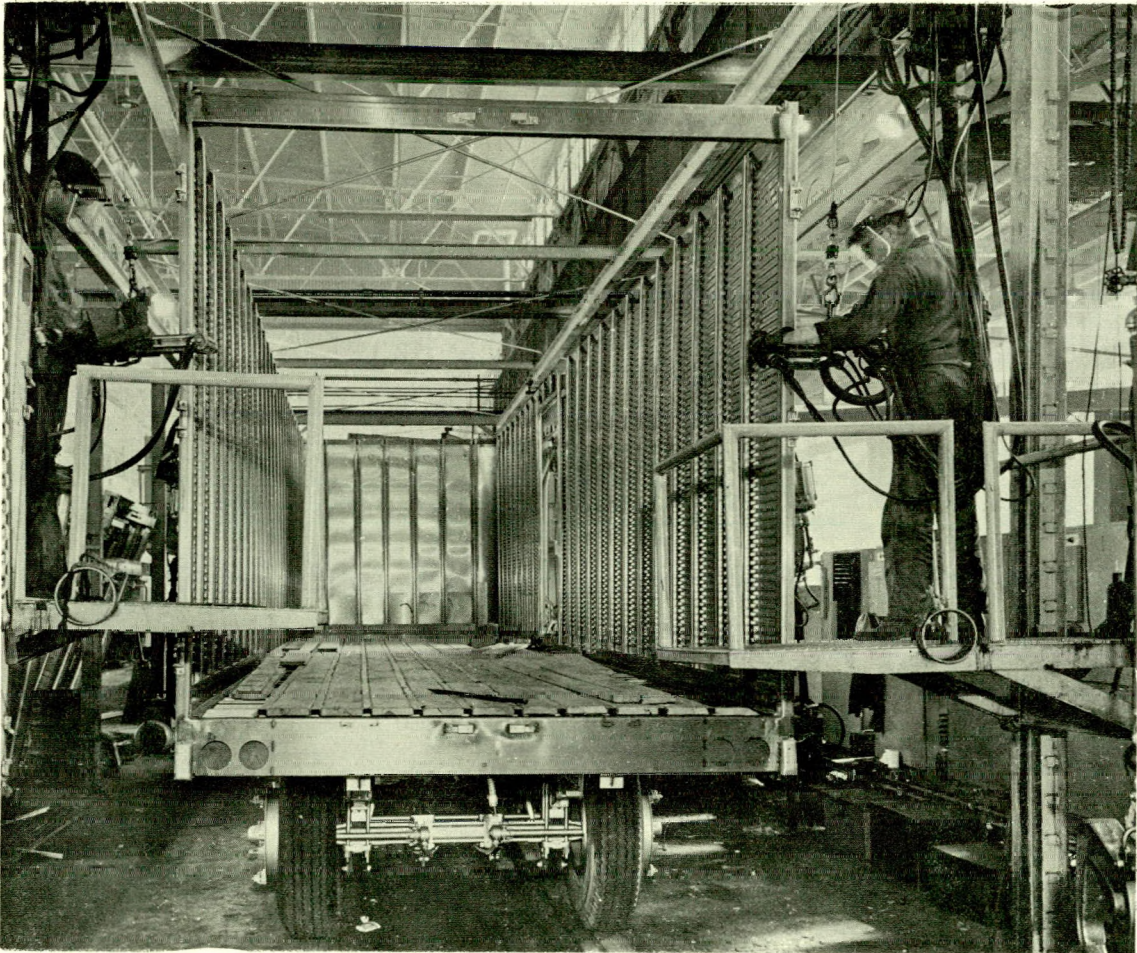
ALMAR 363 STRUCTURAL MEMBERS BEING SPOT WELDED
